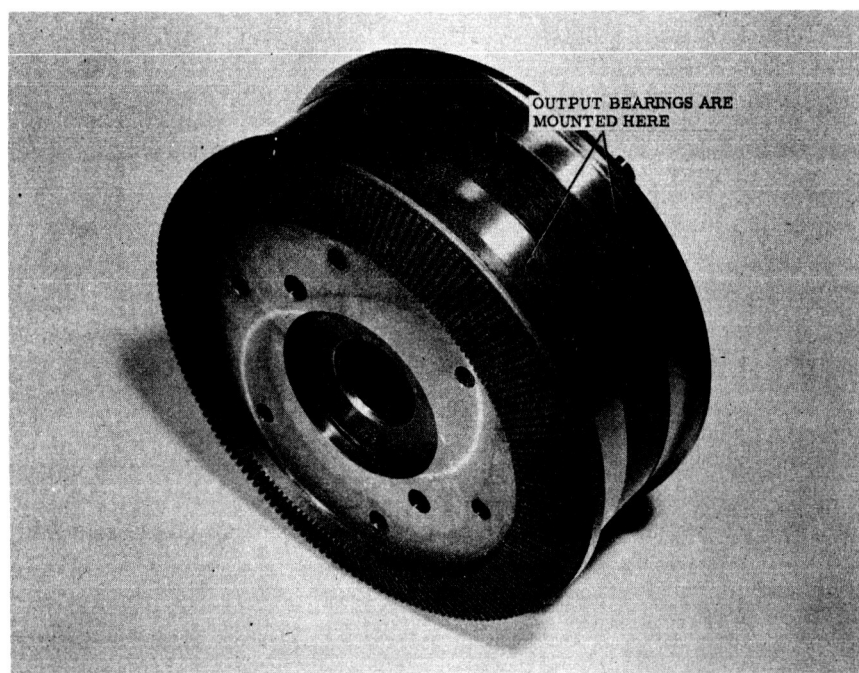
OUTPUT SHAFT ASSEMBLY CONTAINING OUTPUT GEAR
